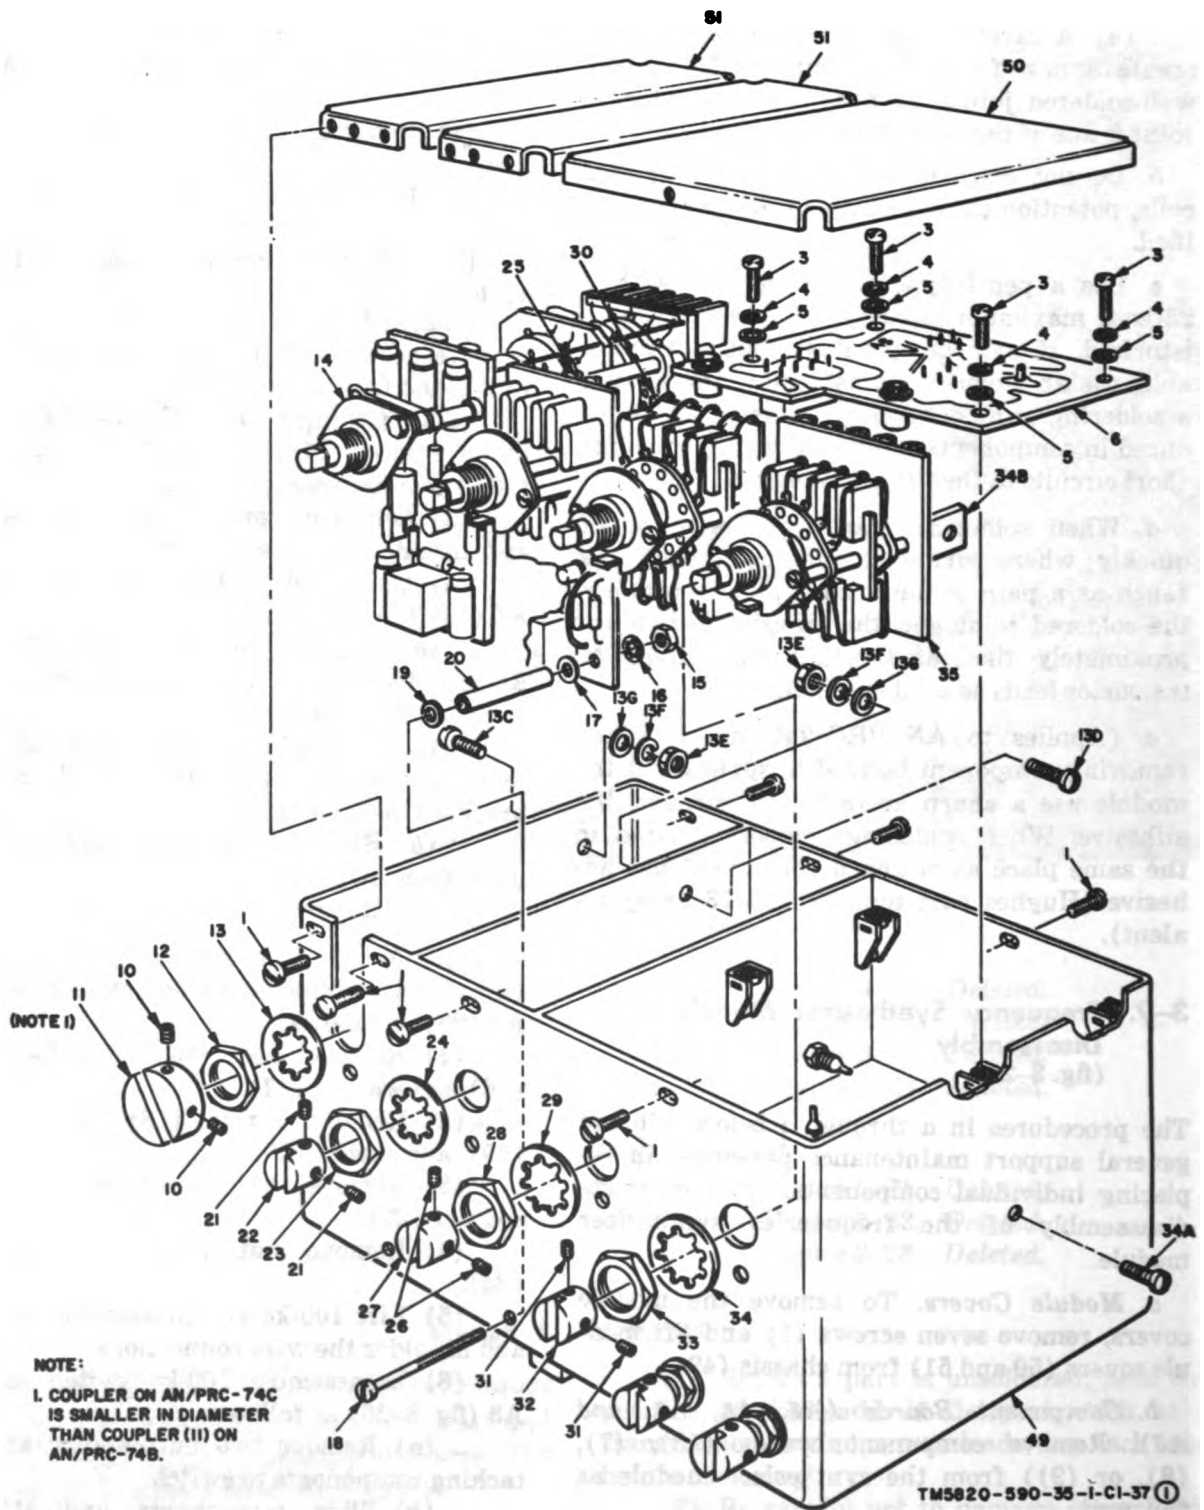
①. Frequency synthesizer module, exploded view (part 1 of 2).
